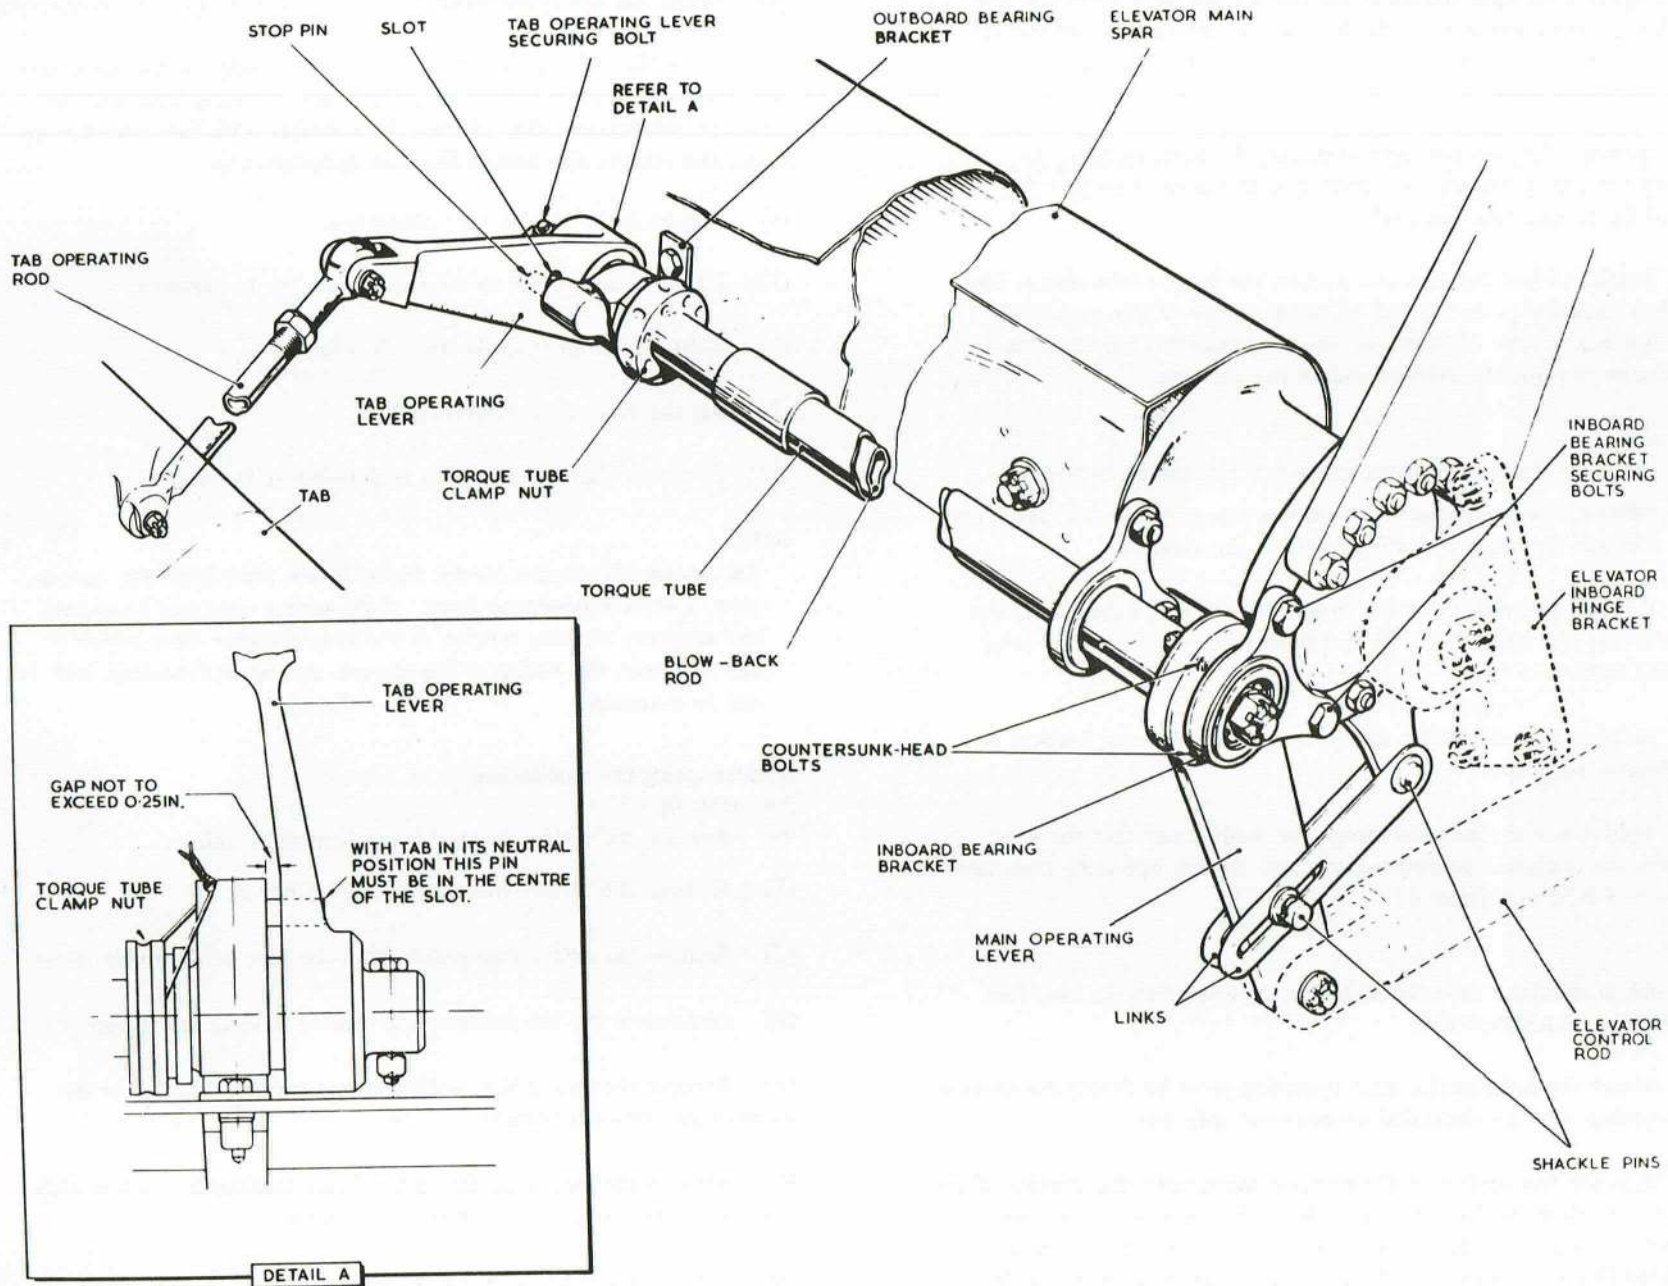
PORT ELEVATOR SPRING-TAB MECHANISM REMOVAL
